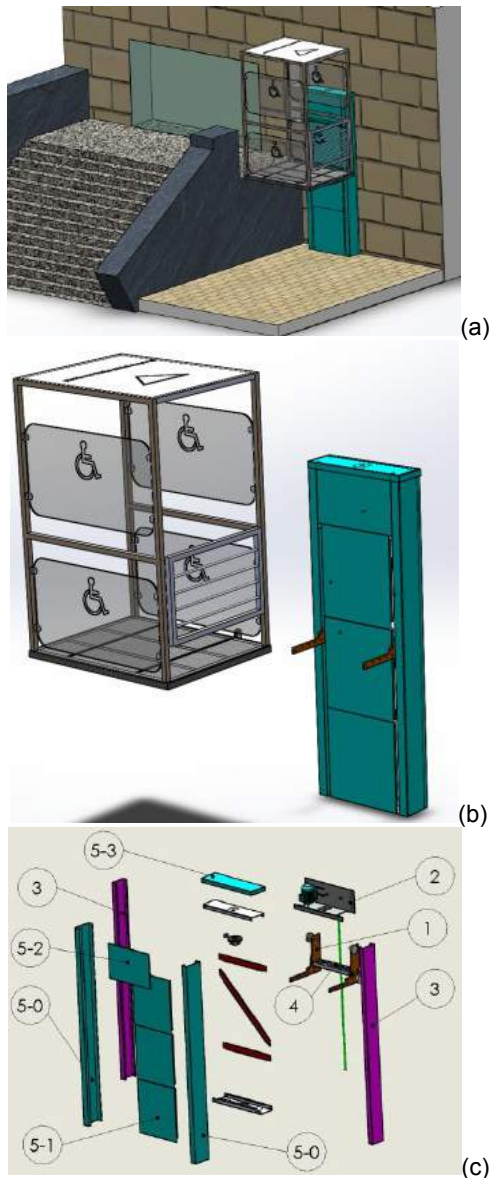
(a) The building application (b) Basic design of the mechanism (c) The exploded view of design
